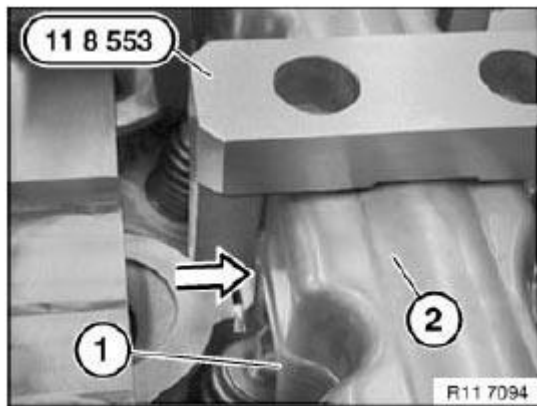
Positioning Special Tool (11 8 553) Over Screw Connection Of Bearing Banks
